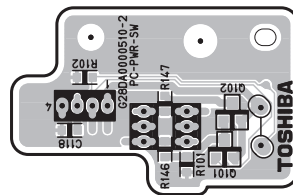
Power Switch PC Board (Bottom side)
